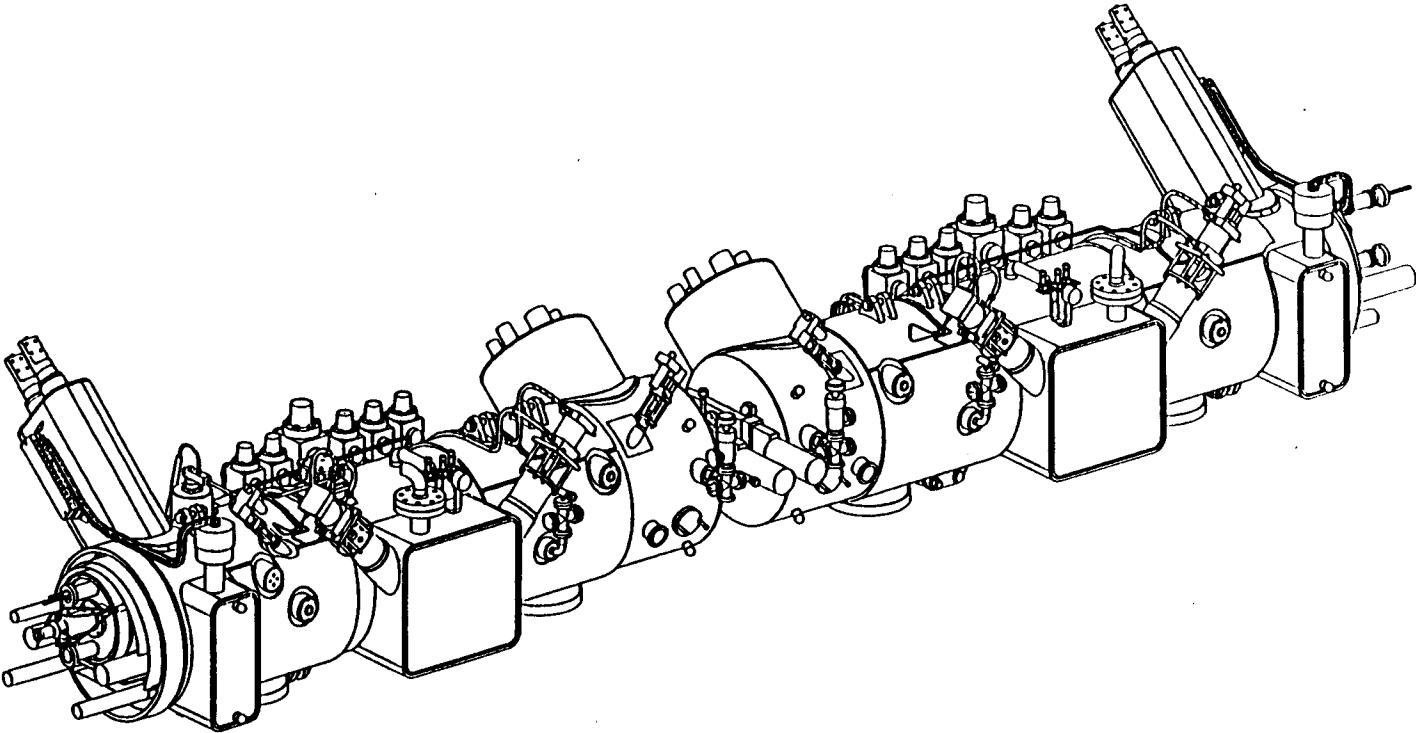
Spool Piece with Recooler and Cryogenic End (SPRE),
